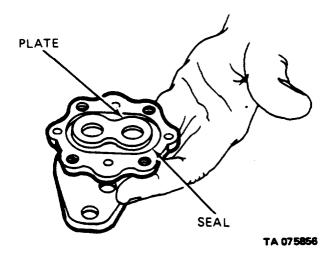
Remove/Install Lower Case Plate and Seal.
